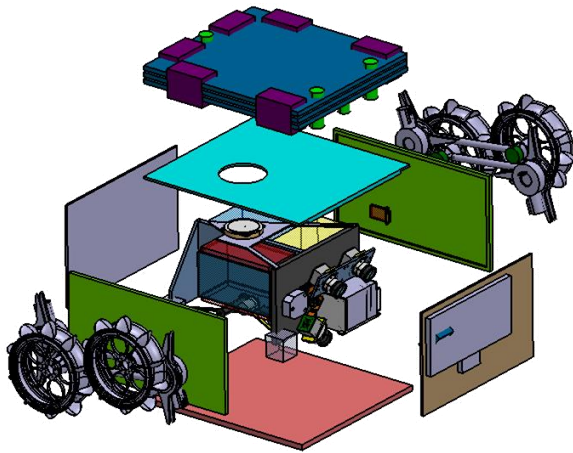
Exploded view of Rover assembly, showing Service Module, chassis, locomotion system and solar generator.
